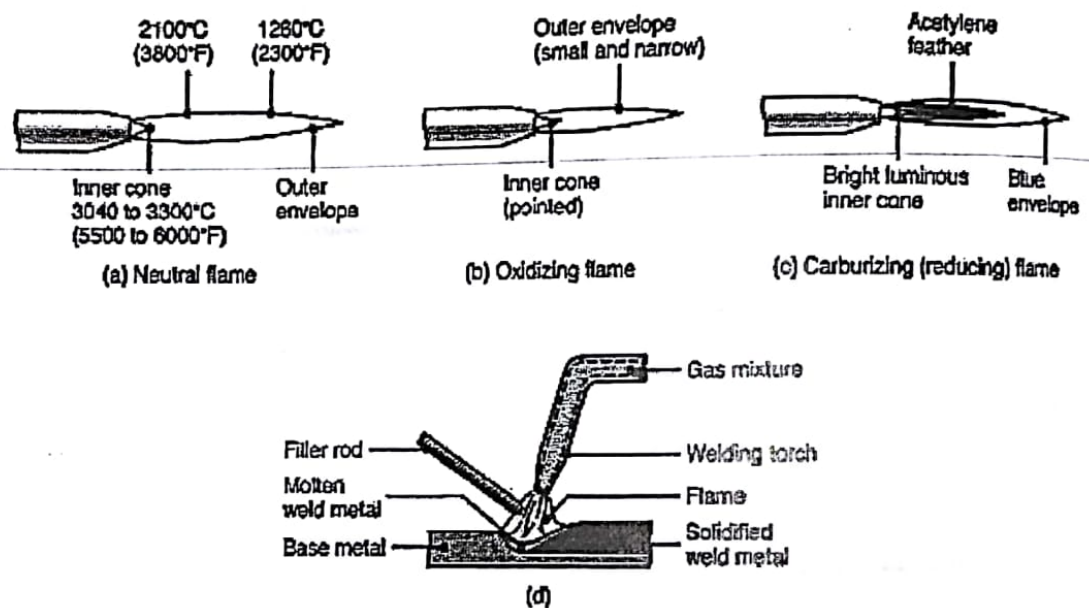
Three types of flames in oxyacetylene welding
